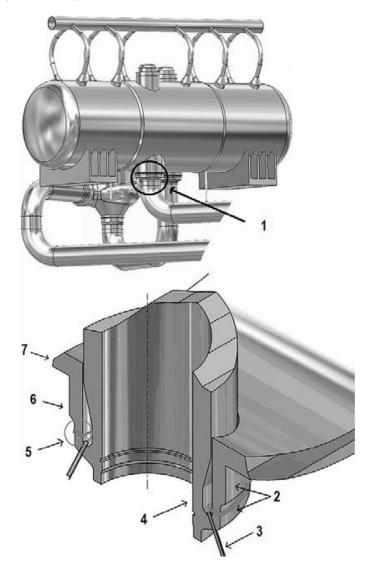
Welded joint between the primary coolant header and the PGV-1000M SG's Dn1200 nozzle where service defects (cracks) form: 1 – SG WJ 111 region; 2 – locations of AE probes; 3 – Dn80 blowdown nozzle; 4 – header; 5 – WJ 111 failure region; 6 – SG nozzle; 7 – SG vessel.
